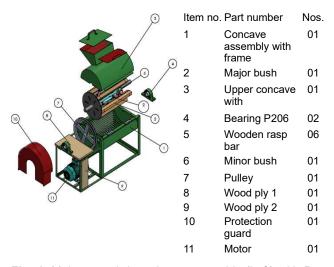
Mahua seed decorticator assembly (Left) with Part details (Right)
